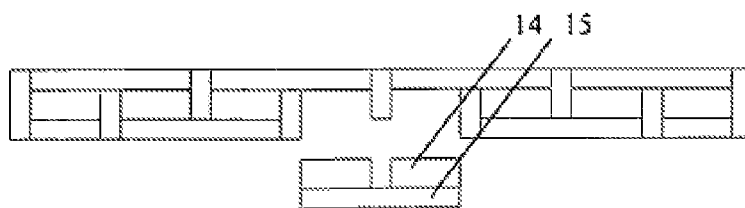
Legs Soldered to a Conductor and Inserted into Eggcrate as a Couple
